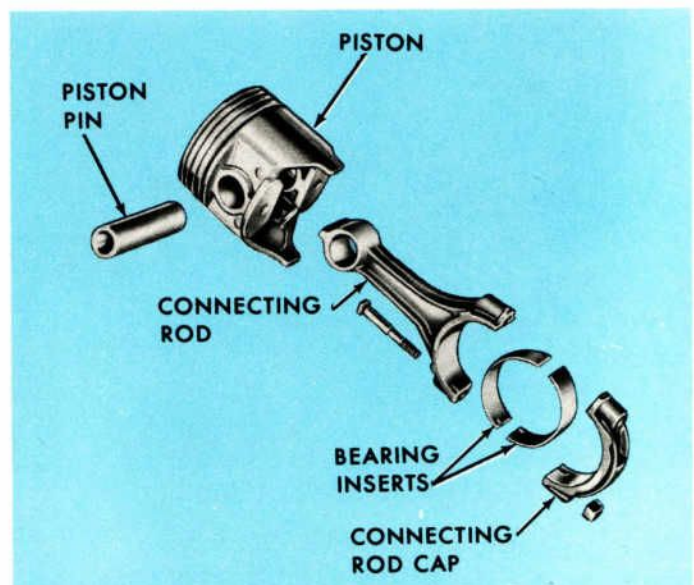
TYPICAL PISTON AND CONNECTING ROD ASSEMBLY
